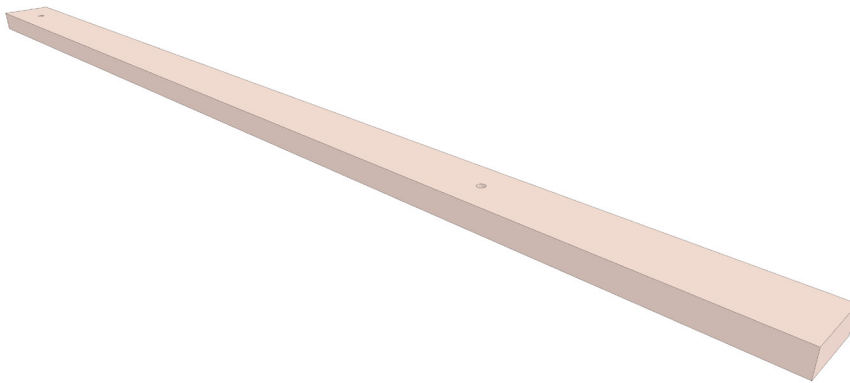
Drilling 12mm clearance holes for M10 bolt fixing
